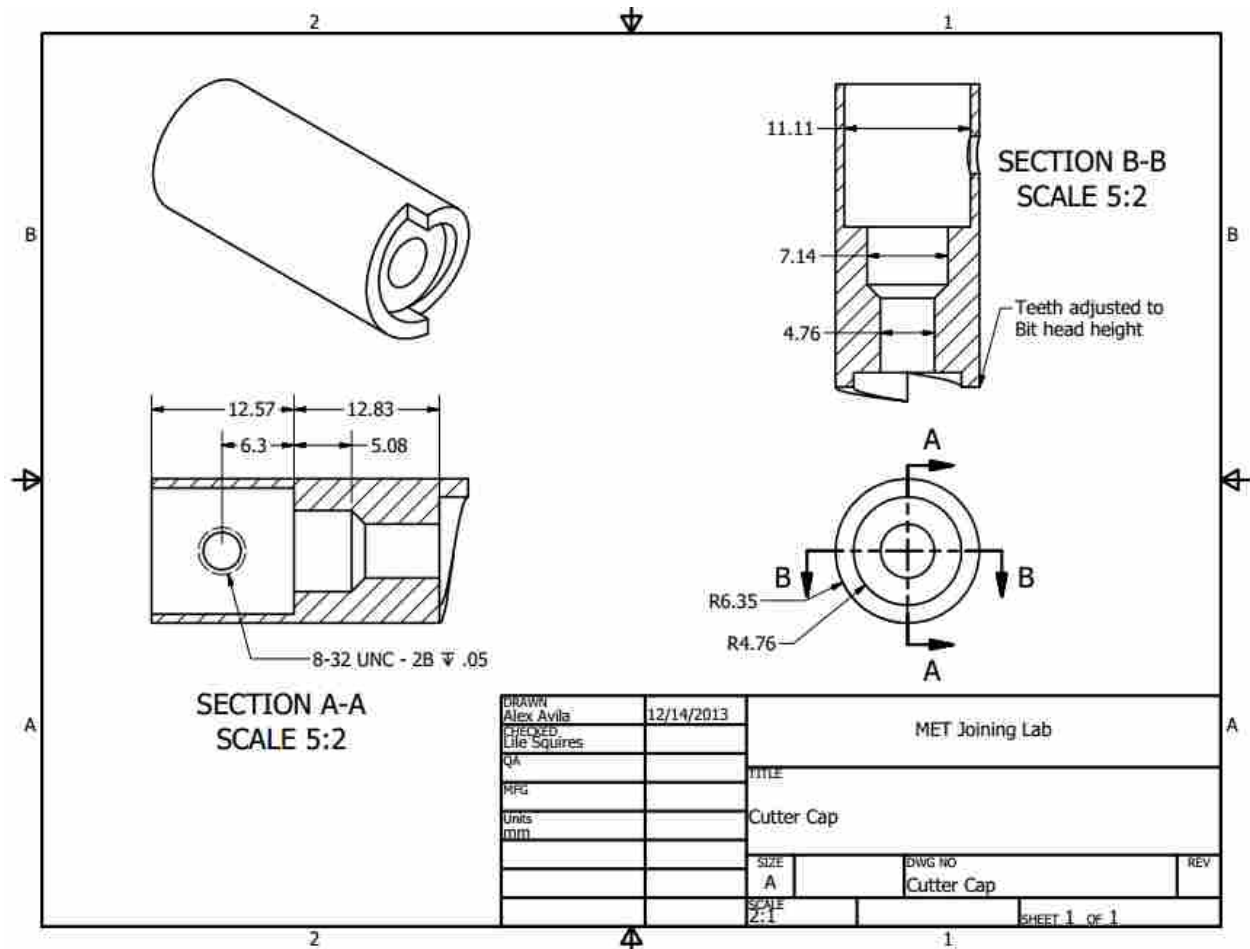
Cutter Cap System for Removing Burrs during the Weld Cycle
